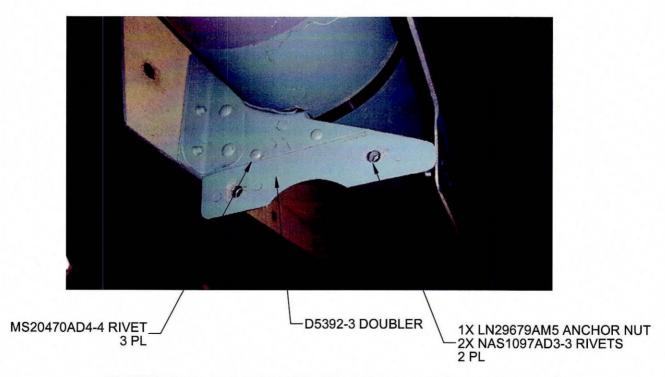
ANCHOR NUT INSTALLATION (LH SHOWN, RH OPPOSITE)
